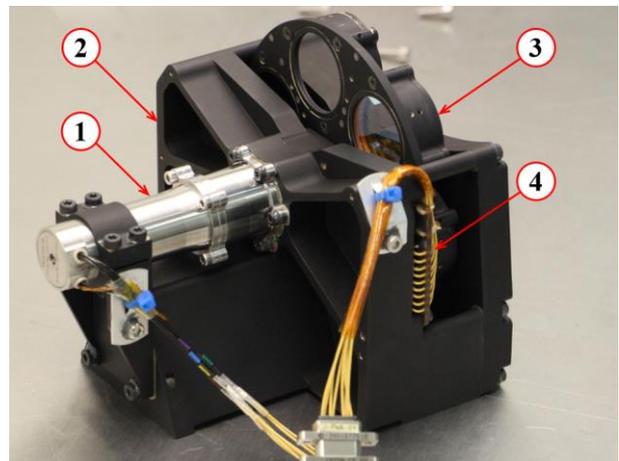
FWA FM during integration. 1-Stepper Gearmotor, 2-Primary Structure, 3-Filter Wheel with Filters, 4-Position Sensor Electronics.
